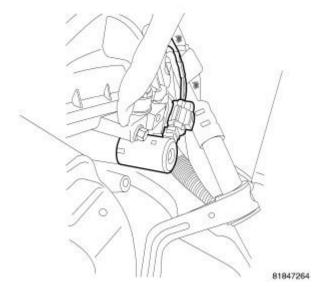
Solenoid Location 1/2 Courtesy of CHRYSLER GROUP, LLC
